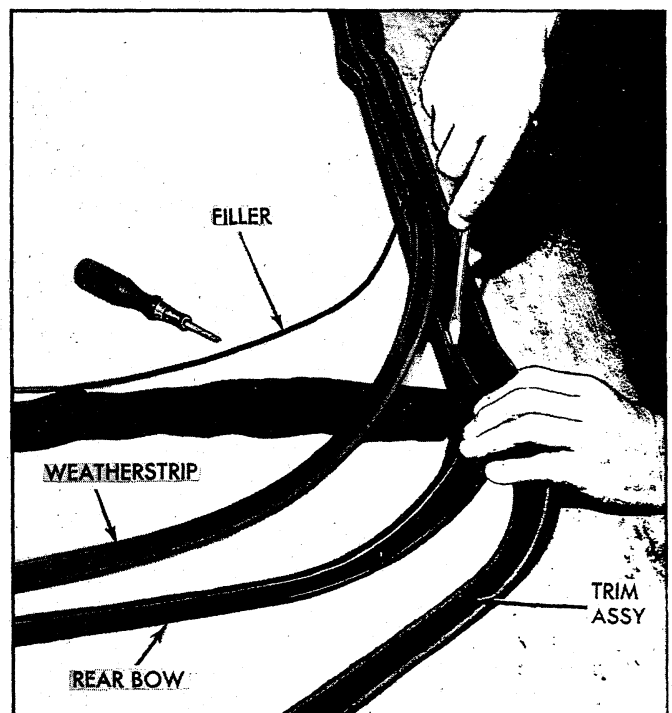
Installing Trim and Weatherstrip to Rear Bow
